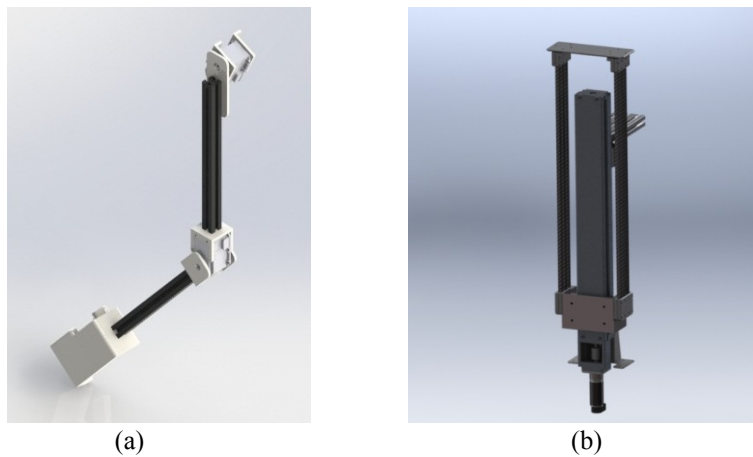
Manipulator (a) and ball-screw drive system (b)
